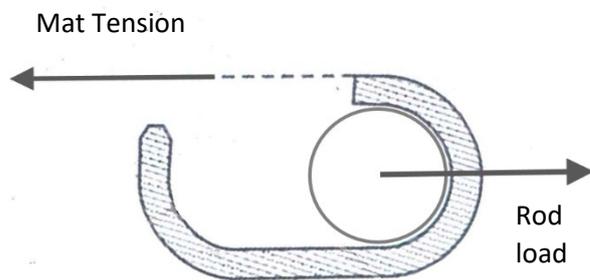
Schematic of mat rod holder assembled - mat tension is opposed by rod load
